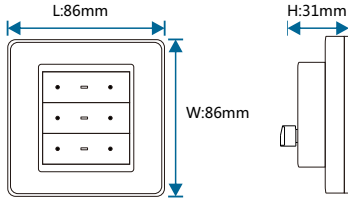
Dimensional Drawing - Front View Figure 7. Dimensional Drawing -Sideview
